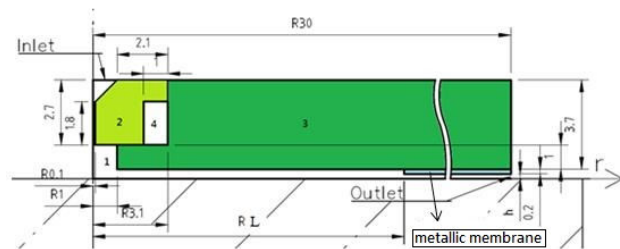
Polymer body with metal membrane at bottom [5]; the bearing is supported on the tops of components 2 and 3
